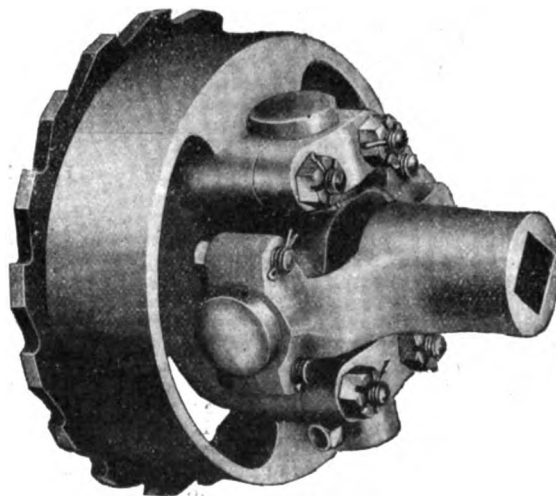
The West Universal Joint, Brake Drum and Ratchet Surag.
